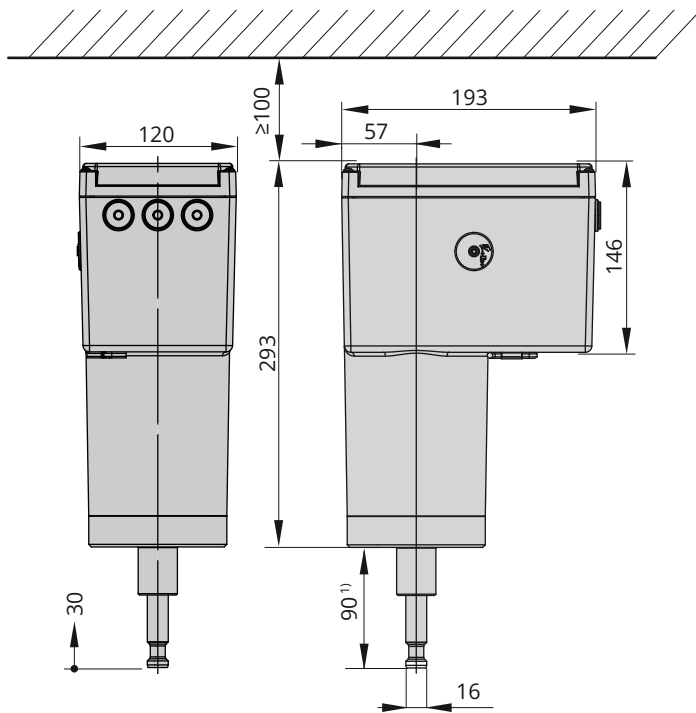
Dimensions in mm · Type 3374-25 and -27, form A version
